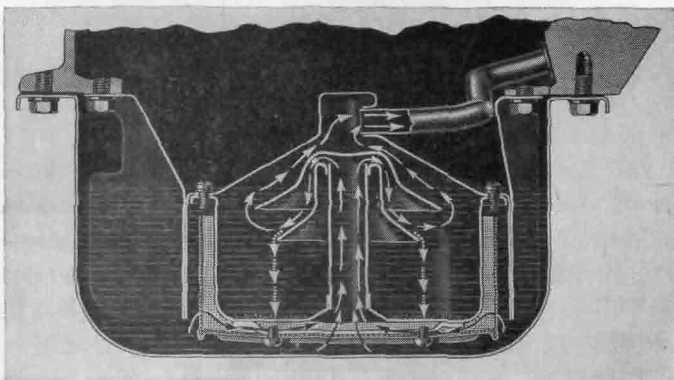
Full-flow oil screen, or filter. All oil from oil pan passes through filter before reaching oil pump and other working parts. *(Pontiac Motor Division of General Motors Corporation)
